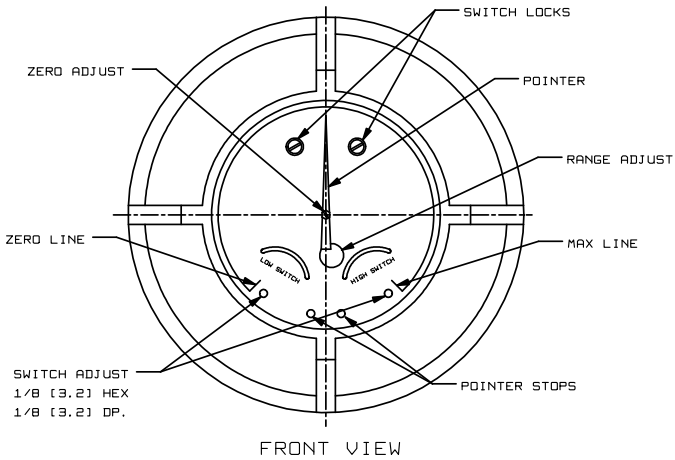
290D OD Drawing (Part 2 of 2)
